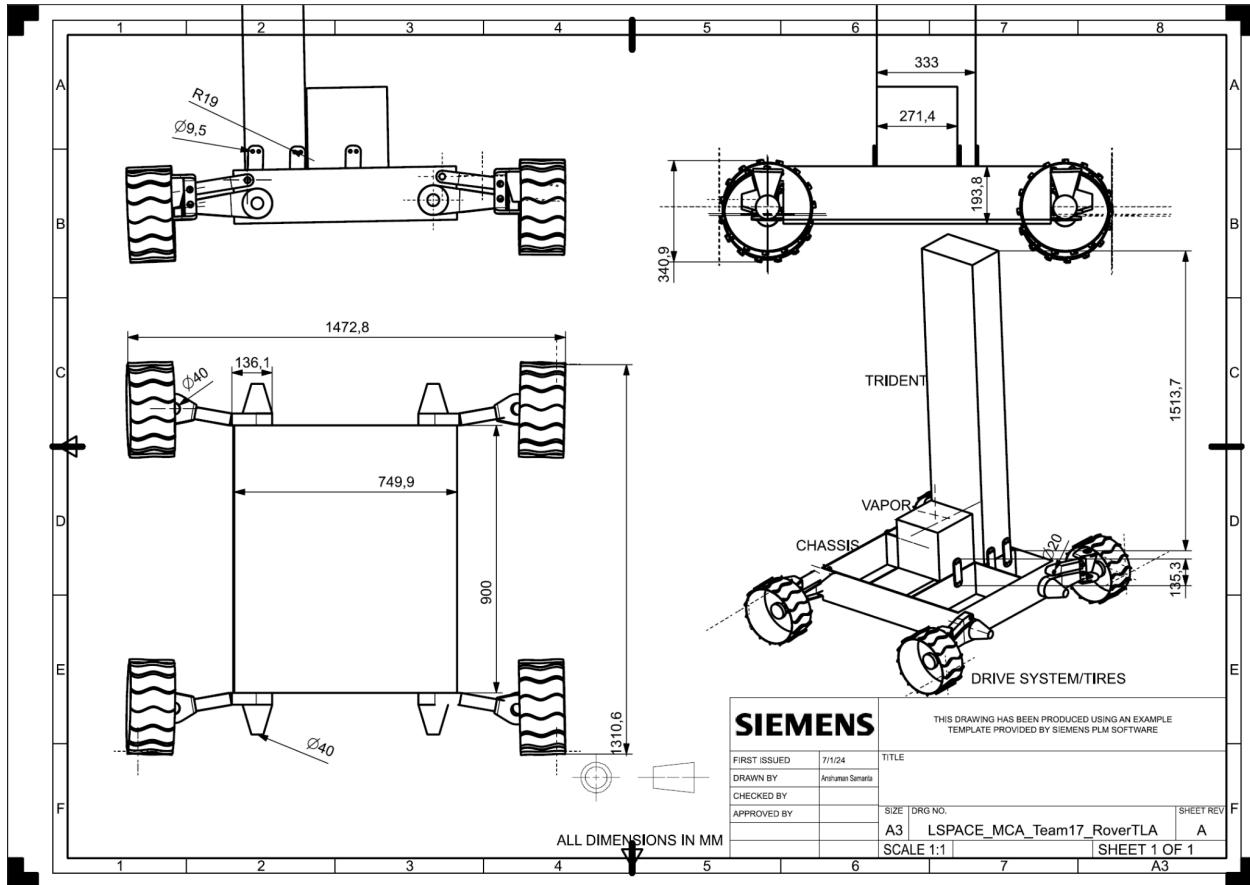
Rover Chassis and Wheels Drawing with Instrument Mounts and Thermal Modifications
